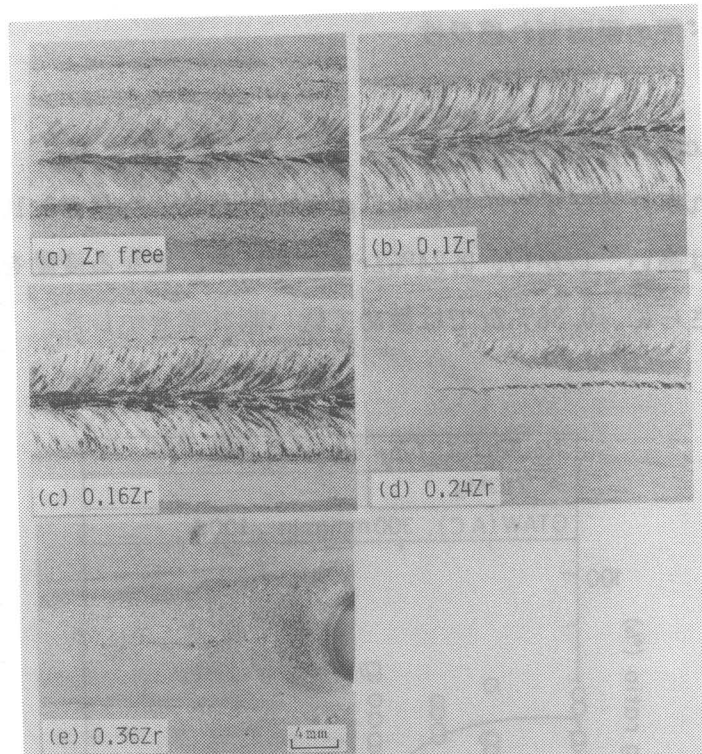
Appearance of weld bead showing macrostructure and cracking.
